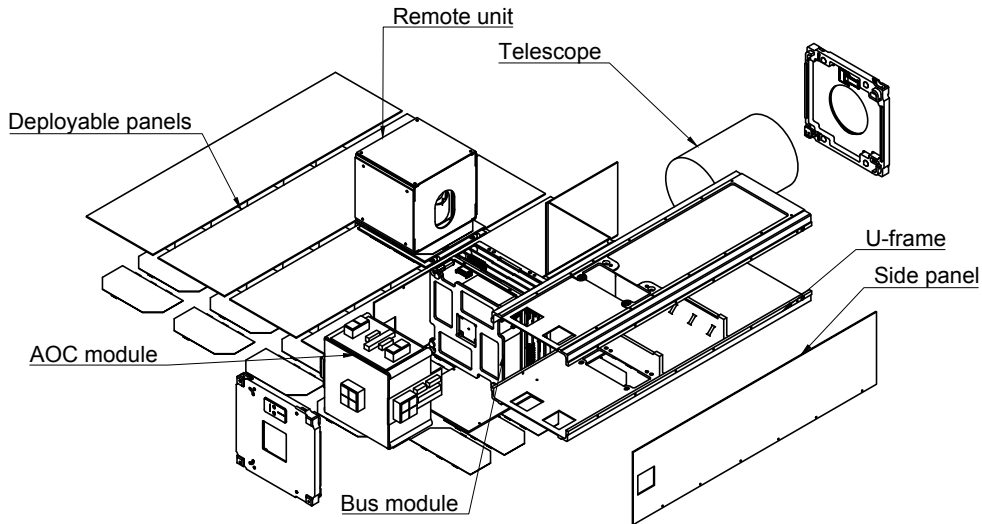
Exploded view of the spacecraft and remote unit in stowed configuration[7].
